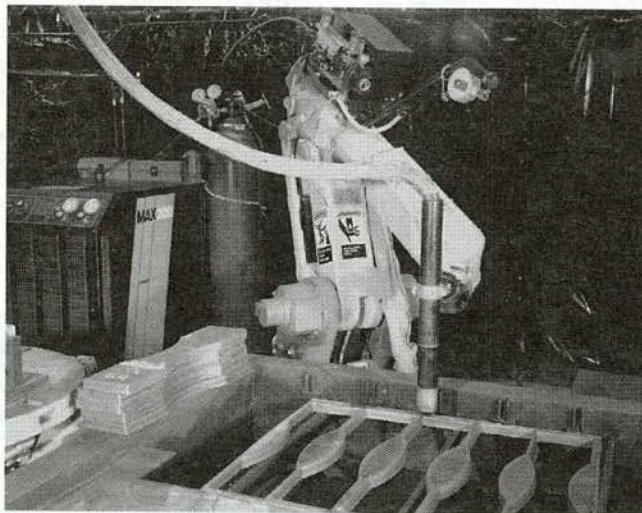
Robotic plasma arc cutting system employing a 5-axis robot and mechanized plasma cutting torch to produce fatigue testpieces.
